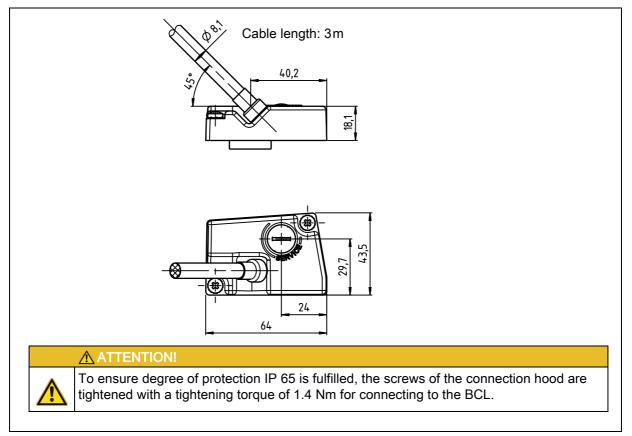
Dimensioned drawing of KB 301-3000 cable hood
